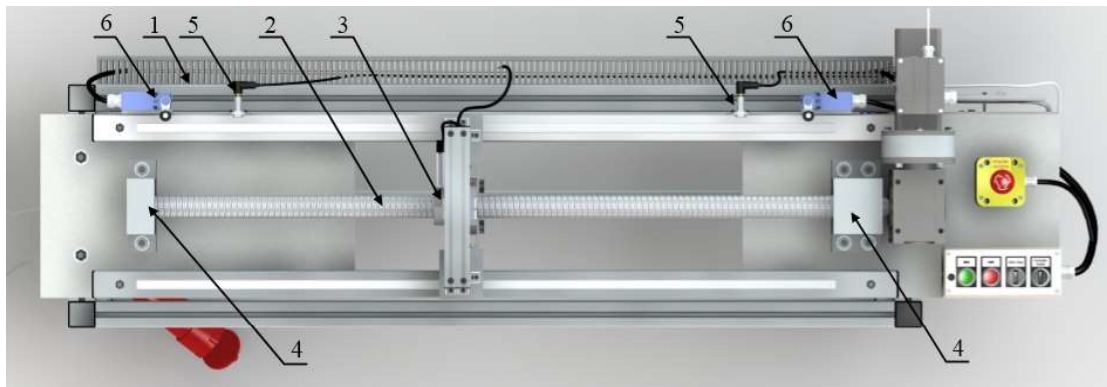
Top view of the 3D model, where: 1 - a cable tray, 2 - the high precision rolled ball screw, 3 - the nut, 4 - bearing blocks, 5 - inductive sensors, 6 - mechanical limit switches
